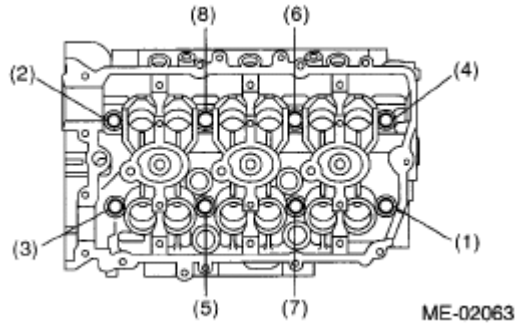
Identifying Cylinder Head Bolts In Numerical Order
